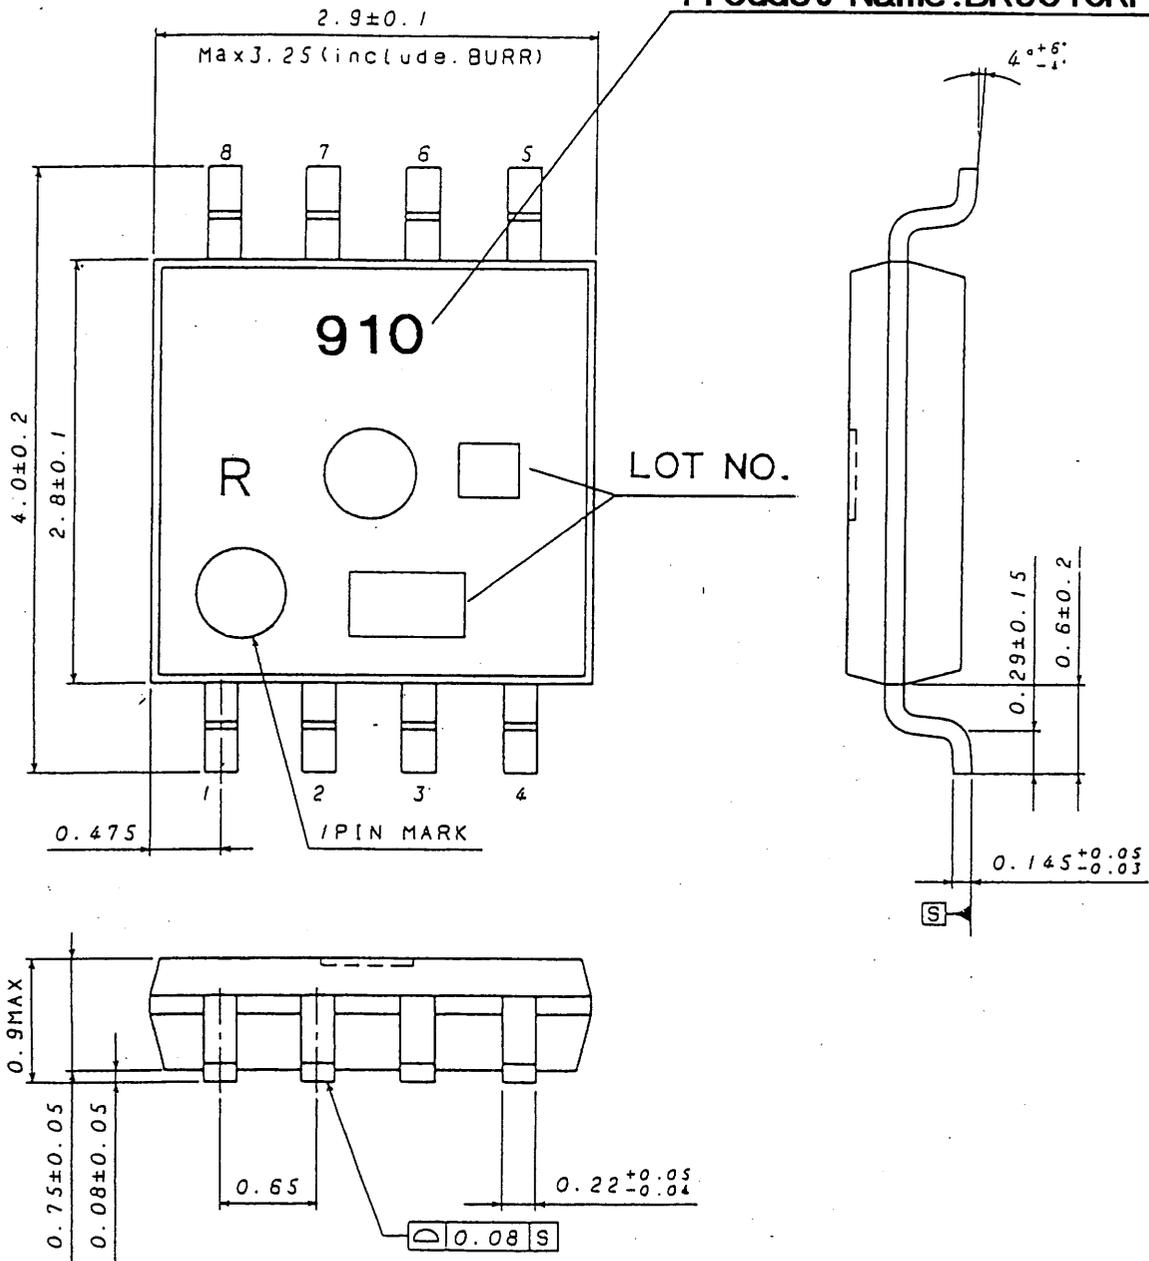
Outline Dimensions SSOP8(BR9010RFV-W)
